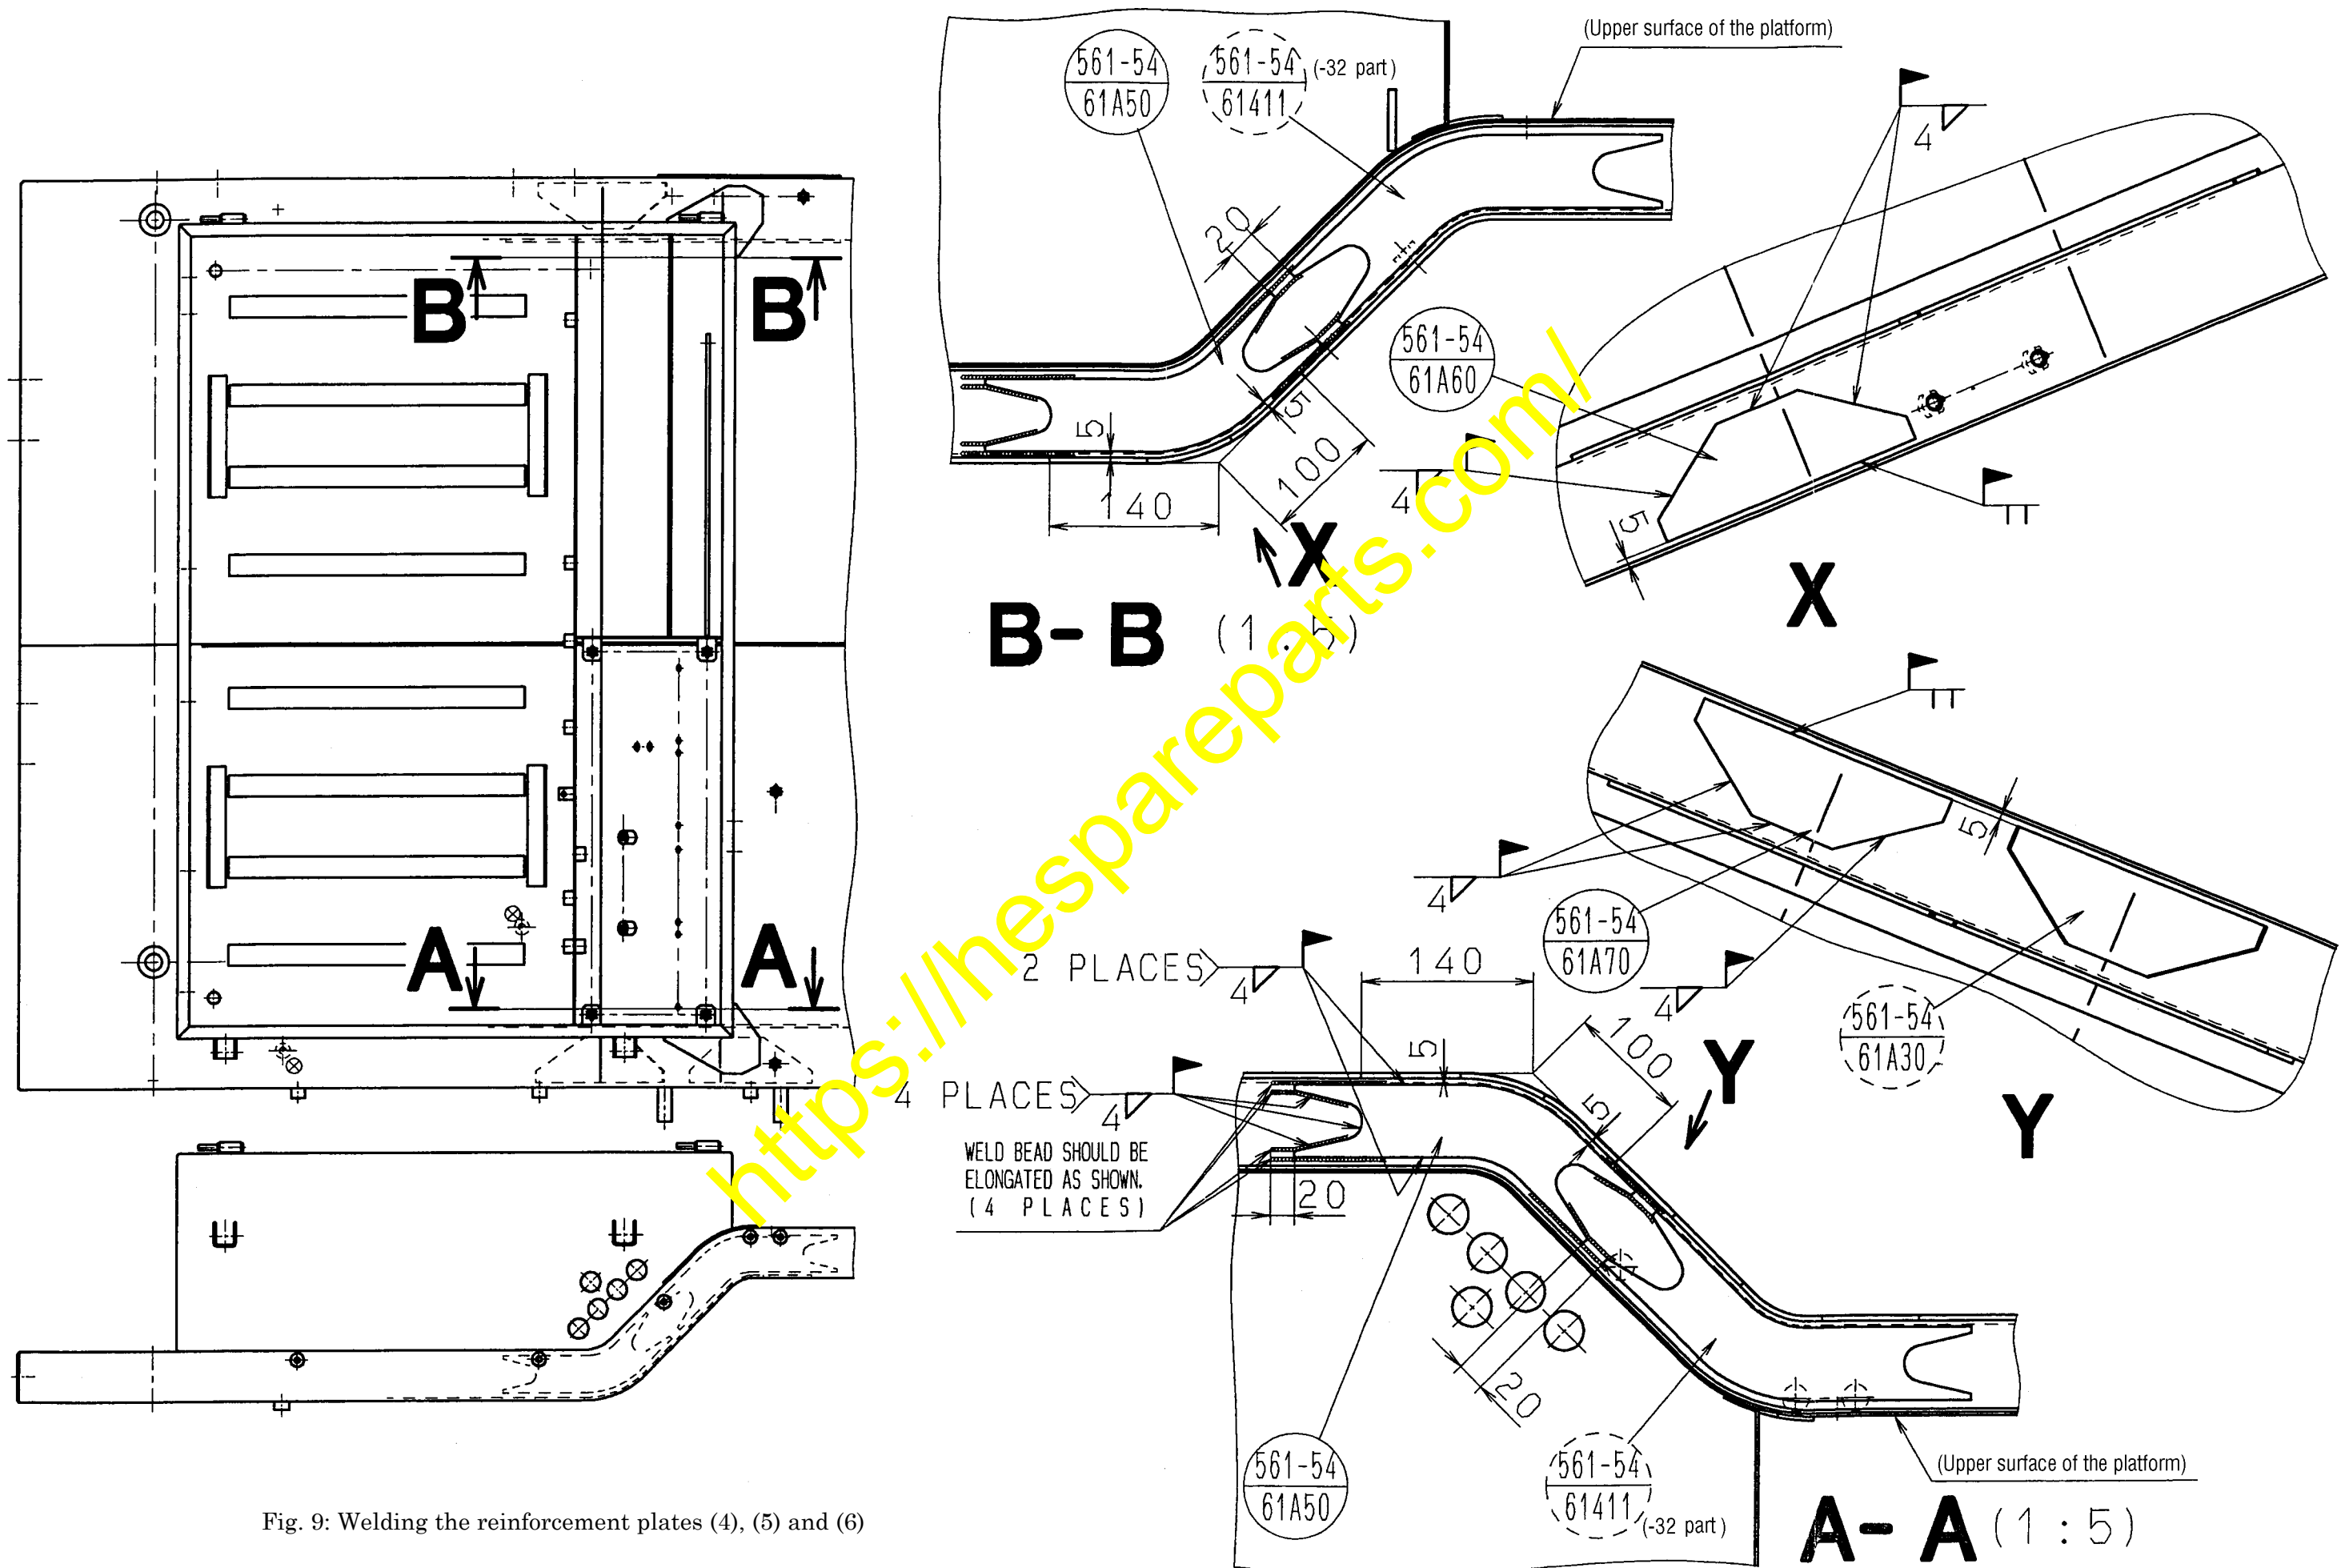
Welding the reinforcement plates (4), (5) and (6)
